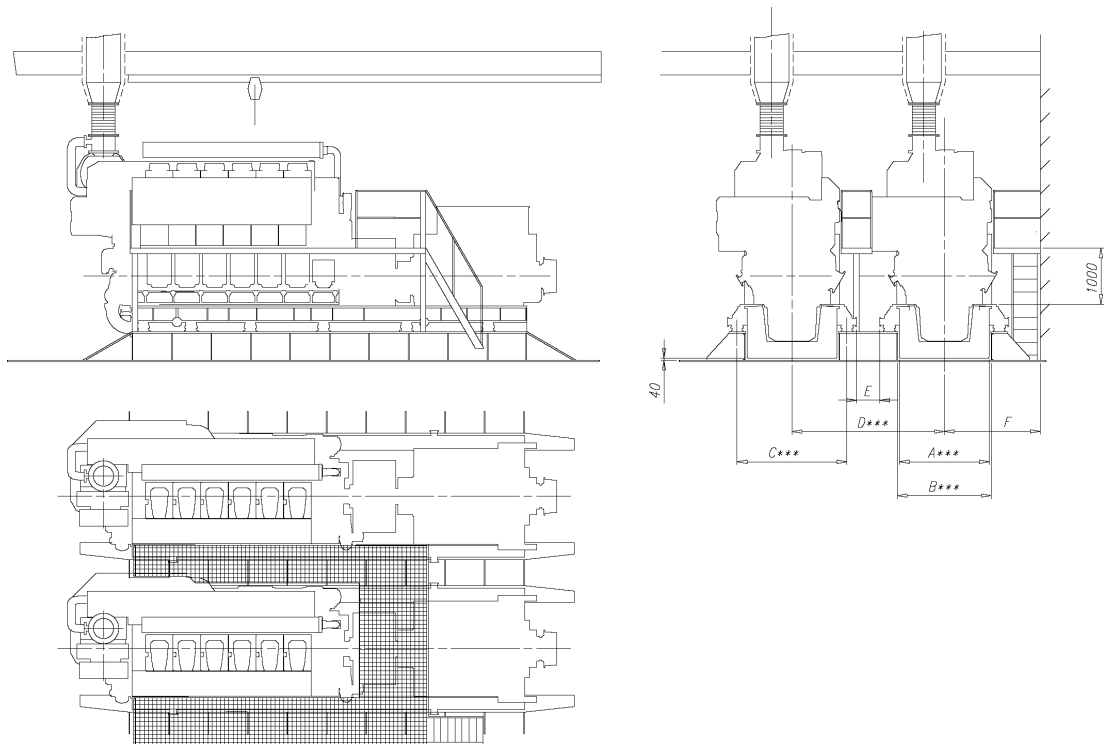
Crankshaft distances, in-line engines (DAAE082973A)
